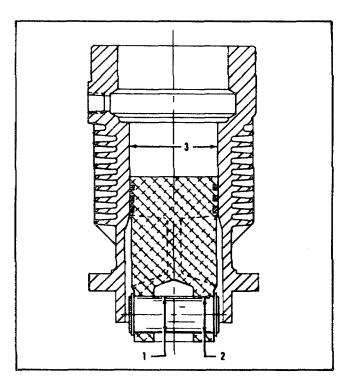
Second Stage Cylinder, Piston and Pin Assy
